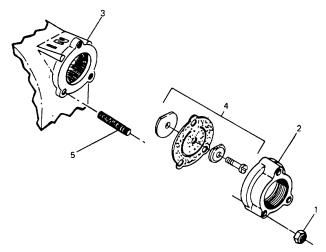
Inlet (Suction) Flange and Check Valve Assembly
